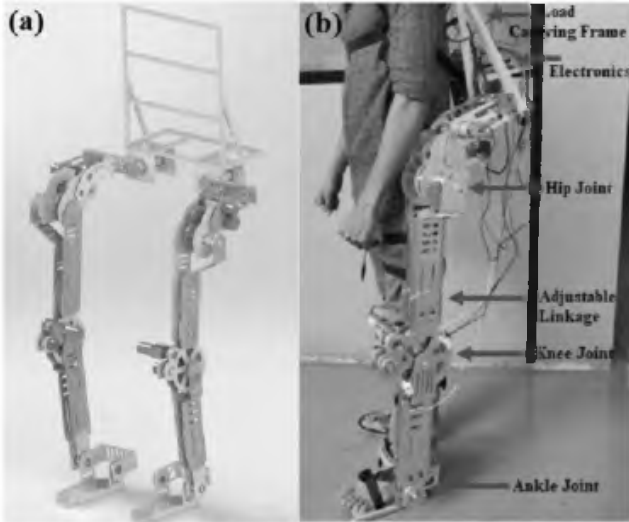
(a). CAD rendering of the exoskeleton (b). Fabricated exoskeleton prototype on a wearer.
